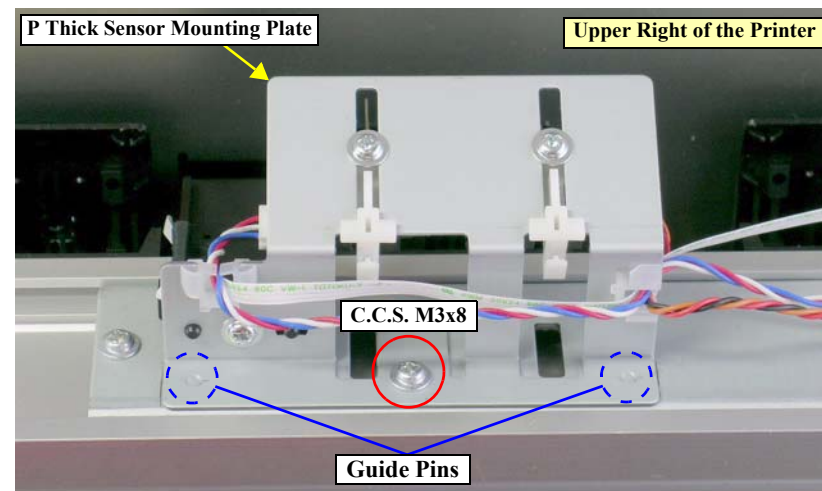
Screws Securing the P Thick Sensor Mounting Plate
